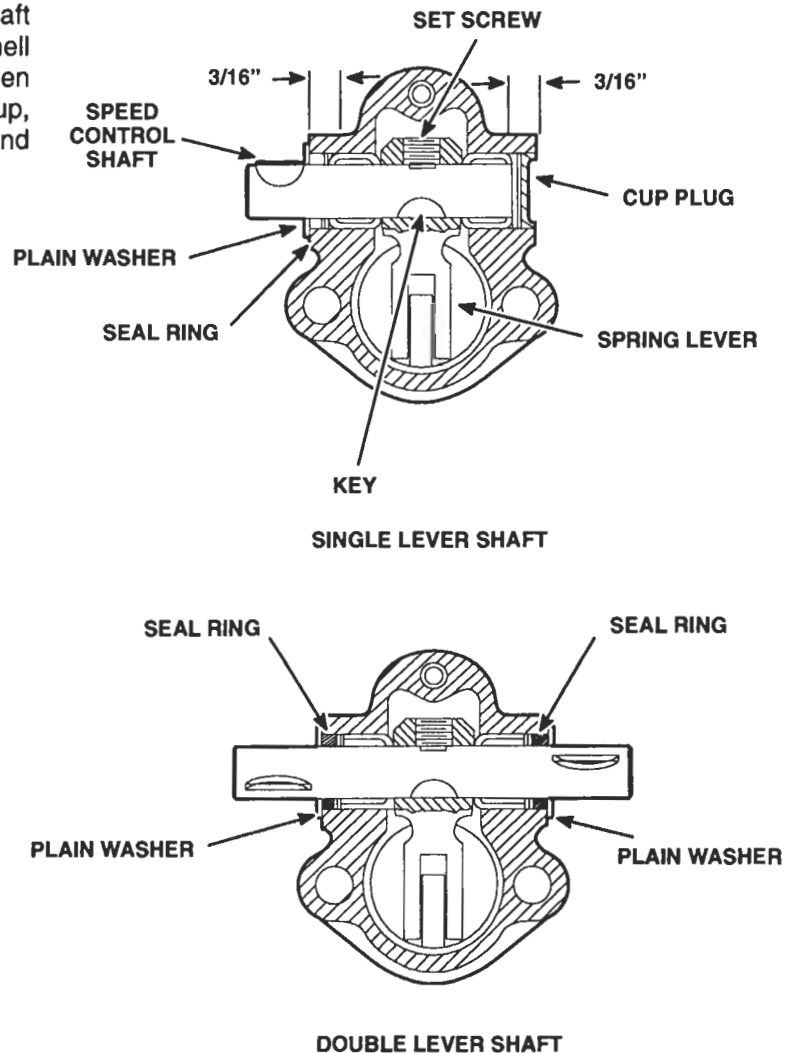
Cross Section of Governor Variable Speed Spring Housing
